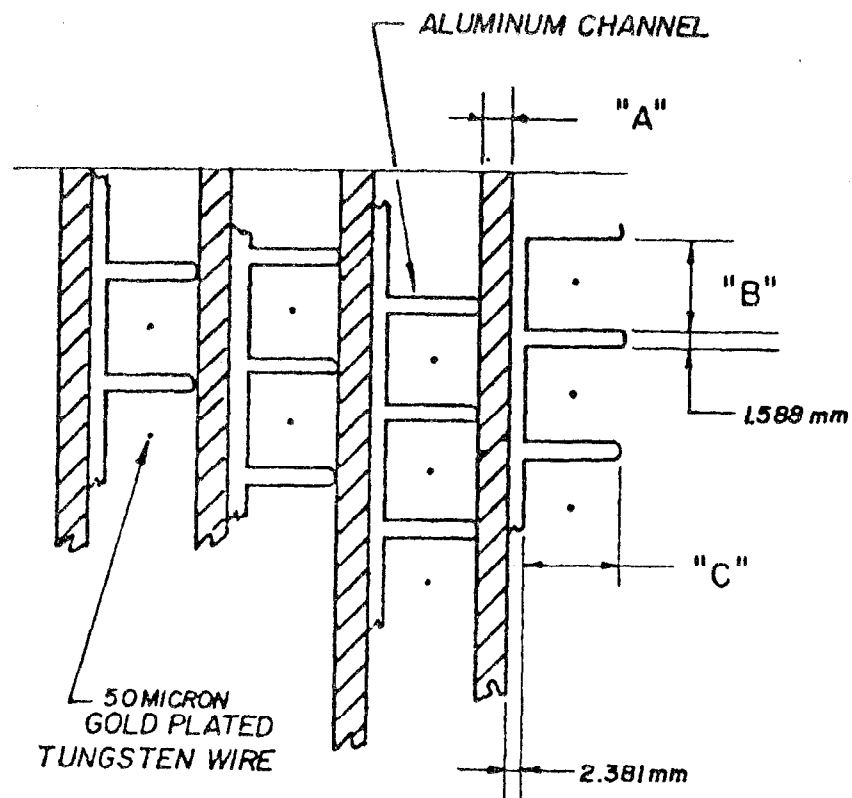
Cross section showing internal detail of the modules. For the shower chamber, dimension "A" = 2.8 mm of typemetal (83% Pb, 12% Sb, 5% Sn), and "B" = "C" = 9.5 mm. For hadron calorimeter, "A" = 2.7 cm of steel, "B" = 1.75 cm, and "C" = 1.27 cm.
